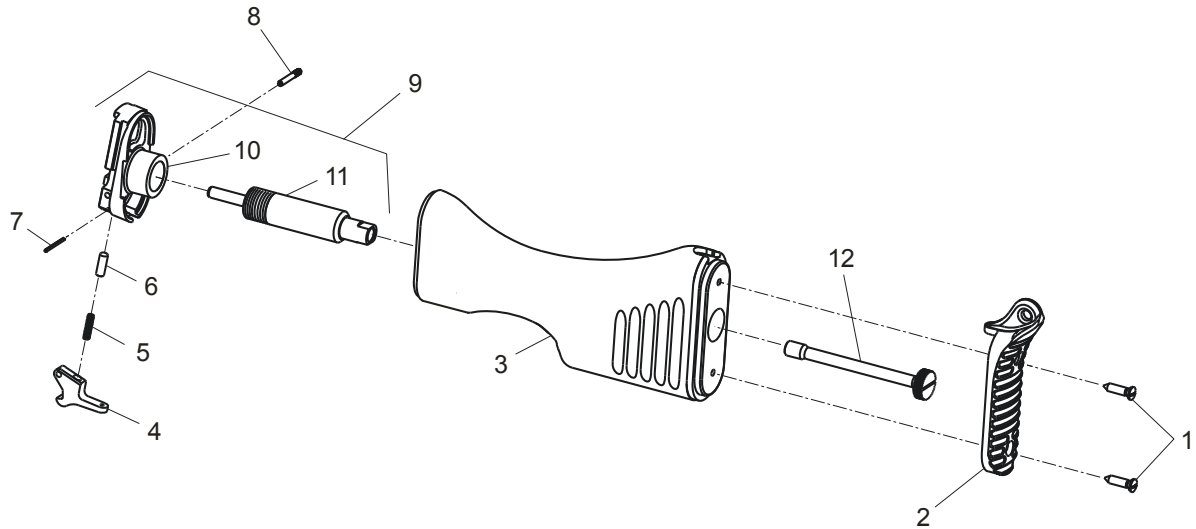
Buttstock and Hydraulic Buffer Assembly, M240B/M240L/M240N, PN 12988986
